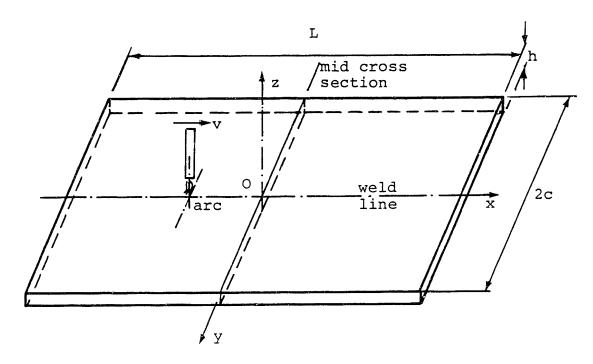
Weldment configuration (Butt welding of plates)
